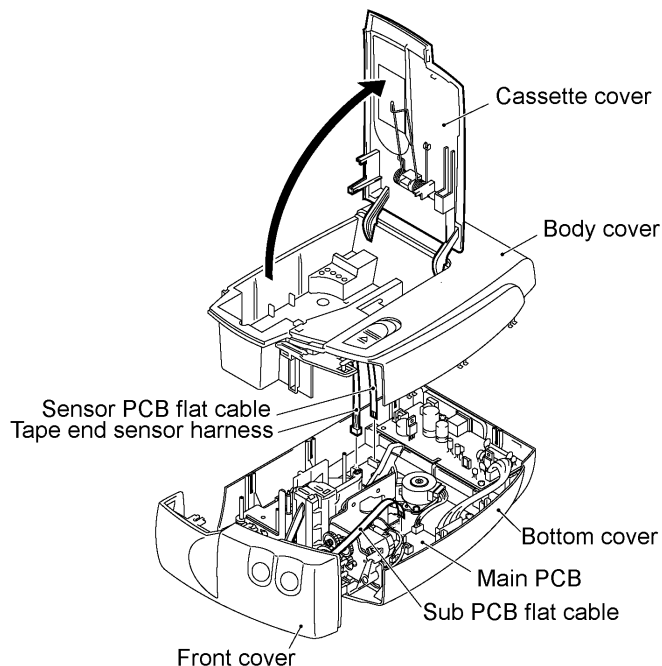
Connecting the Sub PCB Flat Cable, Sensor PCB Flat Cable, and Tape End Sensor Harness
